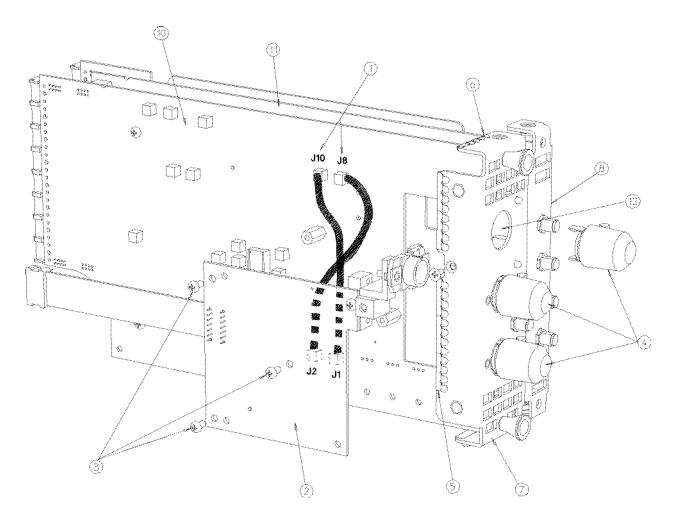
Option UKT/USN STM 1/4 Optical Module- Exploded View (Front)
